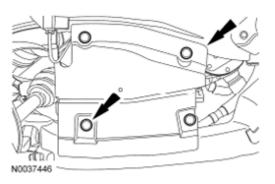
Locating LH Fender Splash Shield Mounting Screws Courtesy of FORD MOTOR CO.
